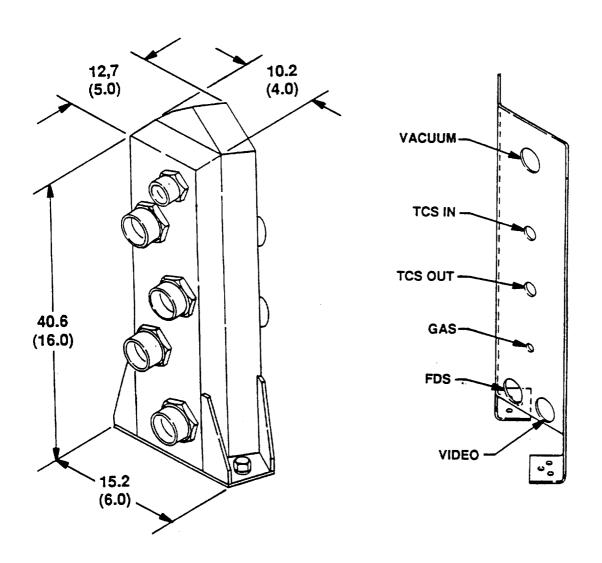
EXPERIMENT RACK-1 PANEL LAYOUTS
